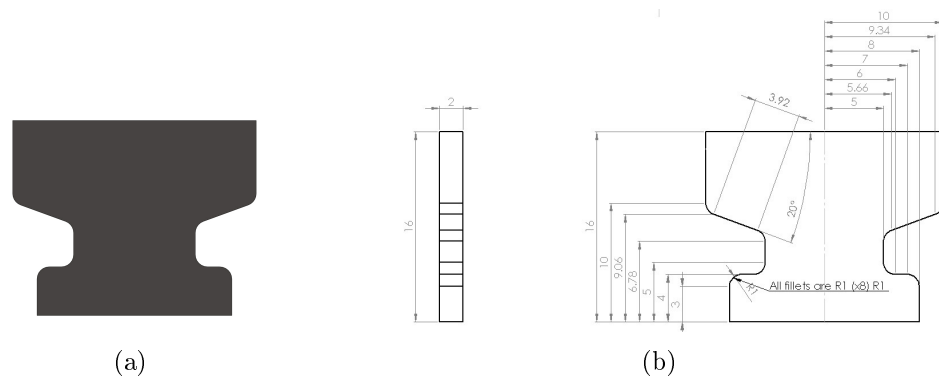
(a) CAD showing the new blade design, (b) Engineering drawing that show the exact dimensions of the new blade design (dimensions are in mm).
